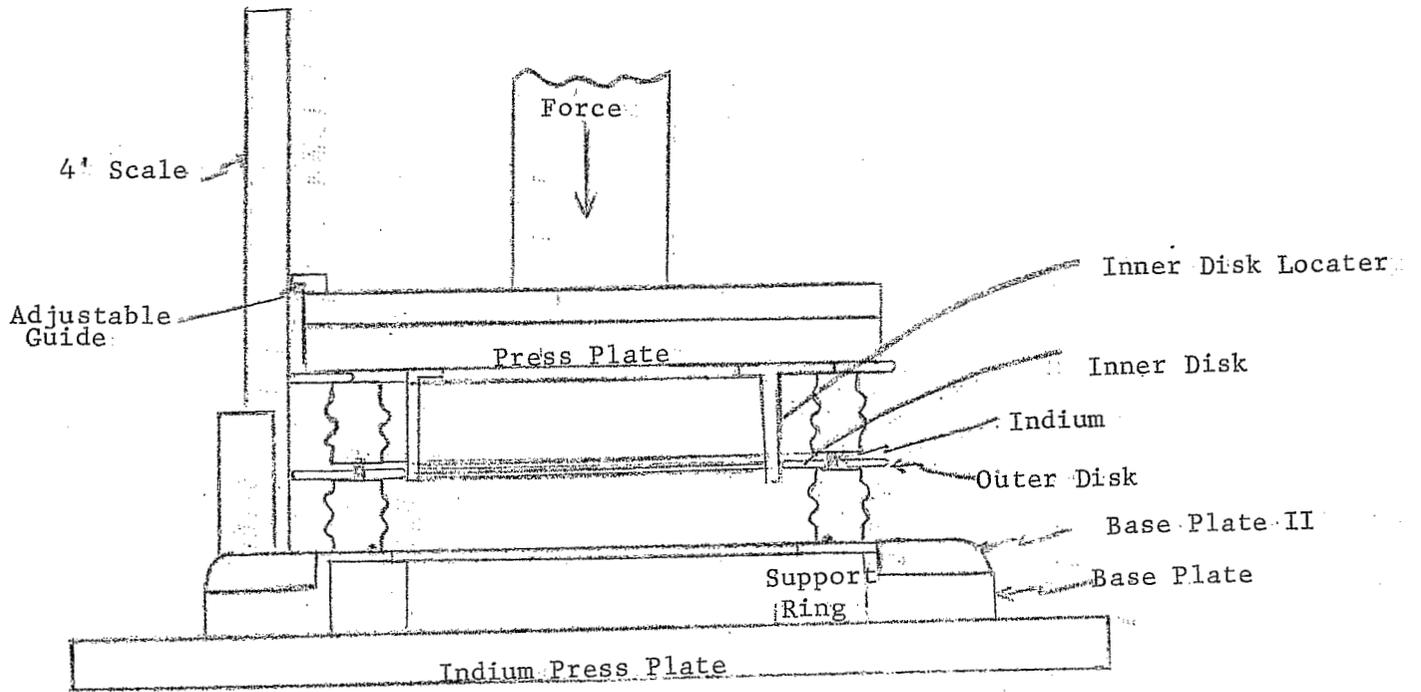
Indium Press and Assembly of Second Ceramic-Aluminum Section
